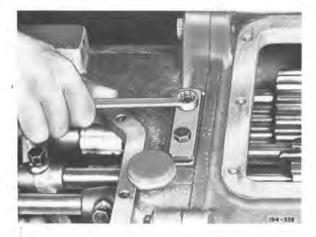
Tightening Shift Rail Poppet Ball Cover Capscrews
